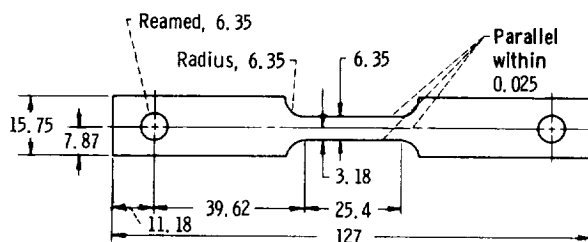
Standard sheet creep test specimen. Tensile axis parallel to final rolling direction. (All dimensions are given in mm.)
